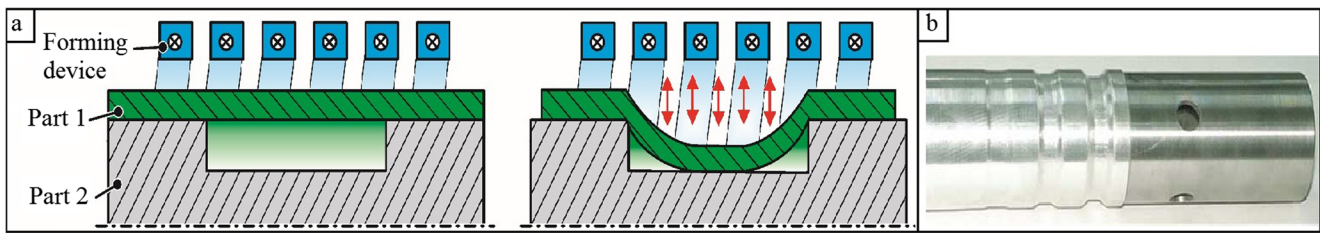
a Mechanism of a form-fit joint [13]. b A form-fit joint of aluminum to aluminum manufactured by EMF [15]
